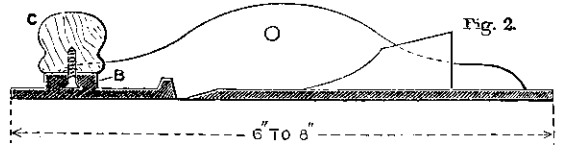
Casting for Block Plane. Fig. 2.—Section through A A.
